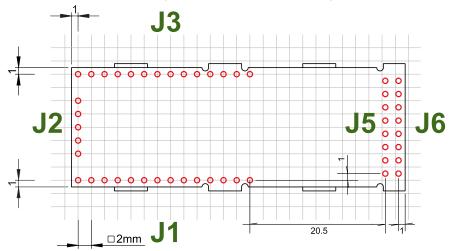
iPOS2401 MX-CAT PCB Footprint
